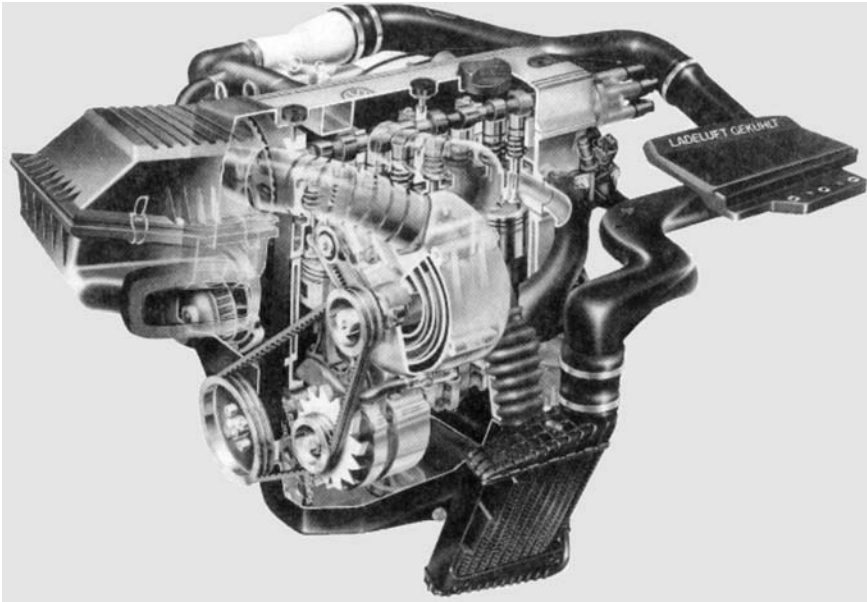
G-Lader supercharger is driven by the engine's crankshaft via a toothed belt drive. Air is taken in at the top of the supercharger. The compressed air leaving the central port passes through the air-to-air intercooler in the lower center of the picture. (Courtesy Volkswagen AG.)
